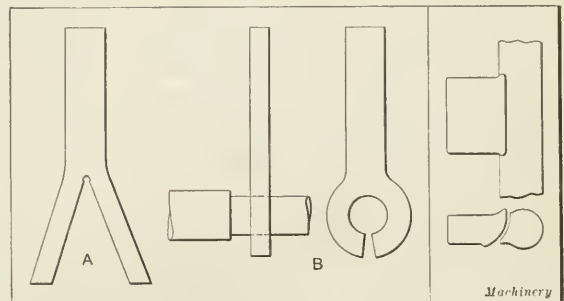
Welding Large Lever to Weigh Shaft—Lever embracing Shaft
